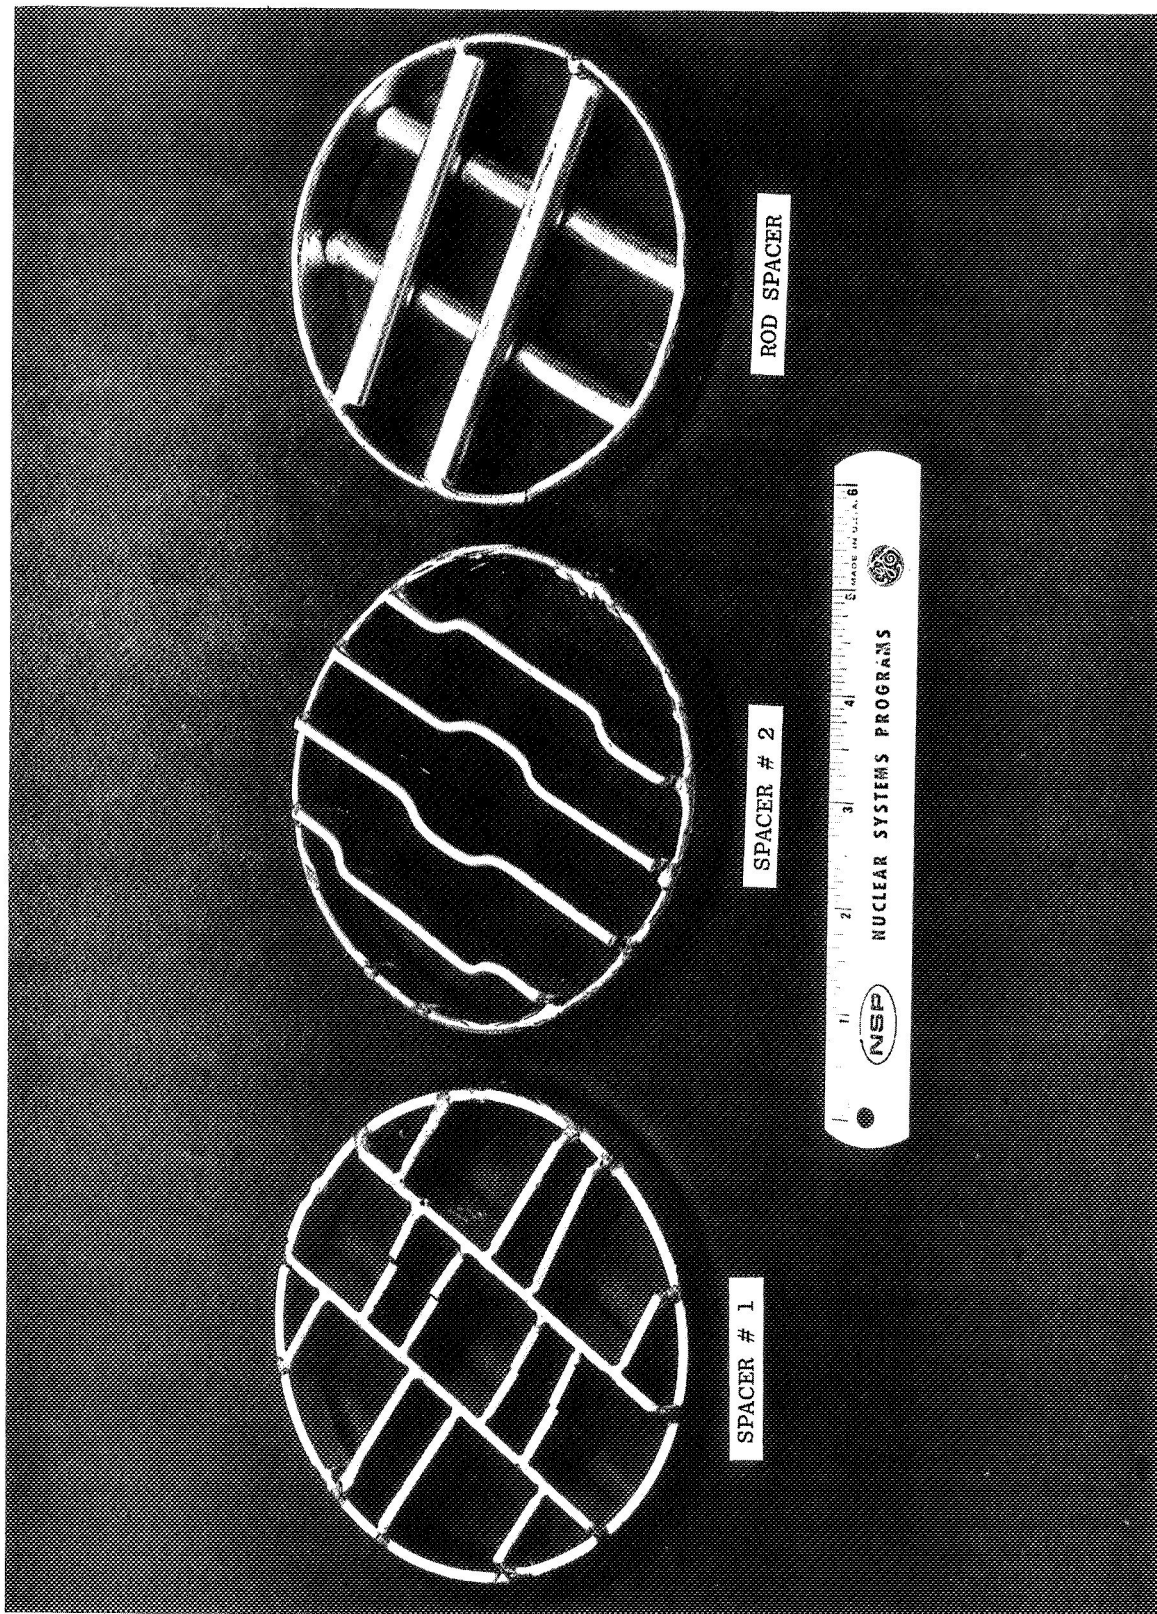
Photographic View of the Tube Supporting Spacers. (69-3-34L)
